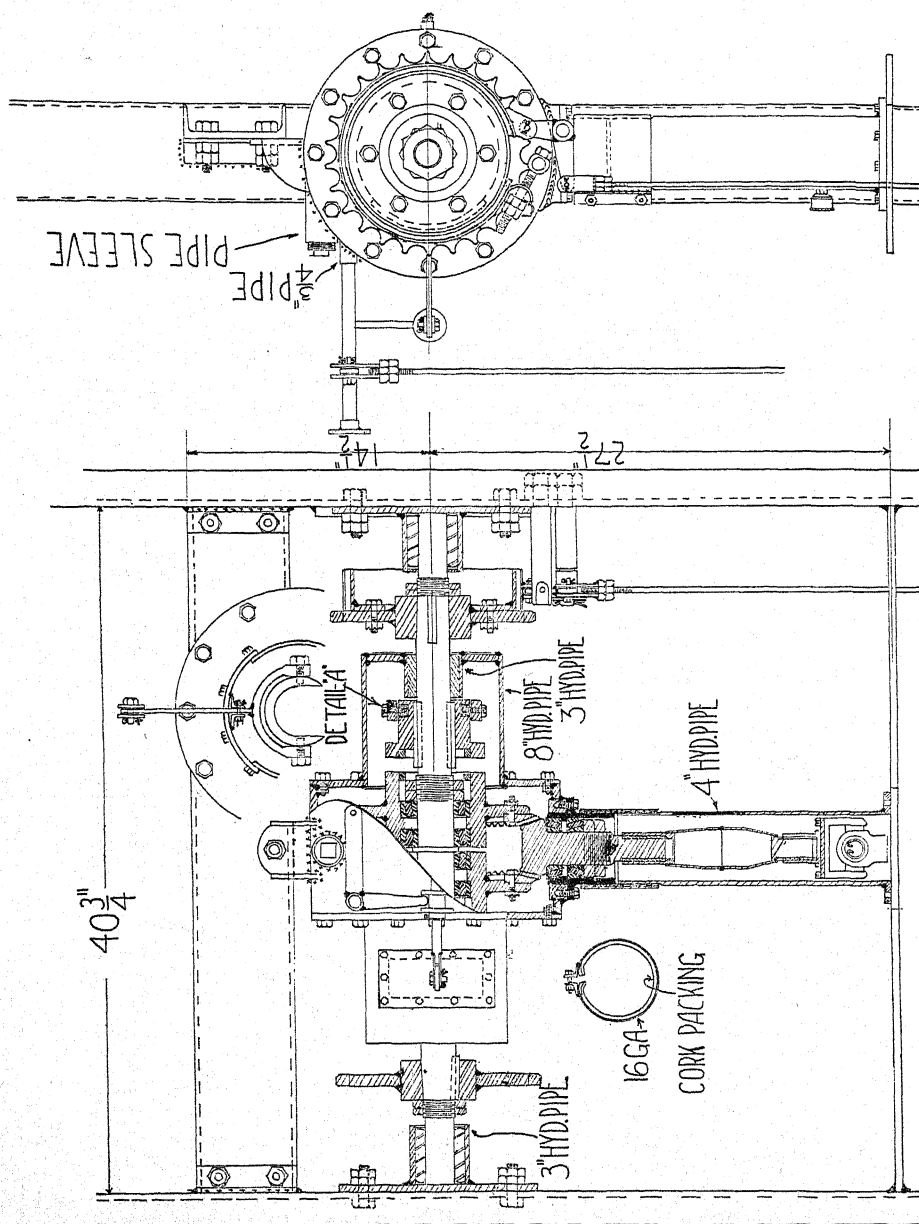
Details of reversing transmission of arc welded rail-car.
